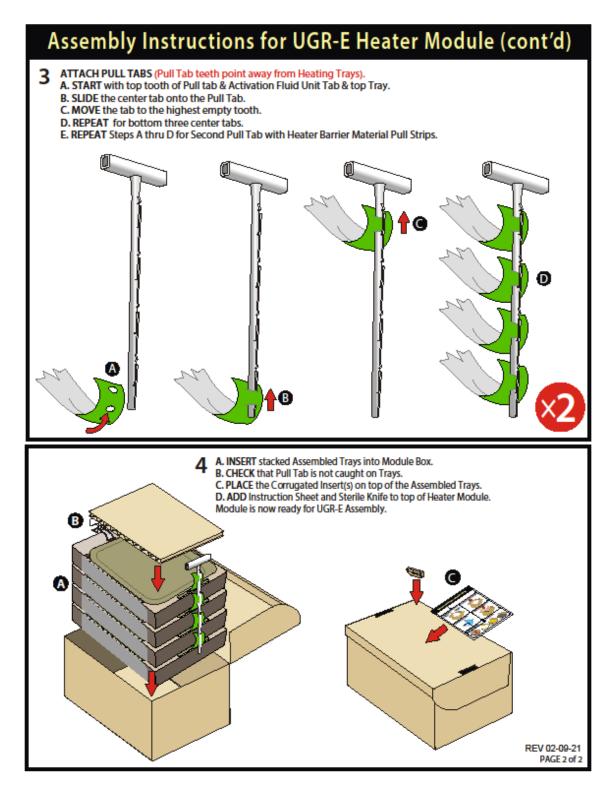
Assembly Instructions for UGR-E Heater Module – Continued
